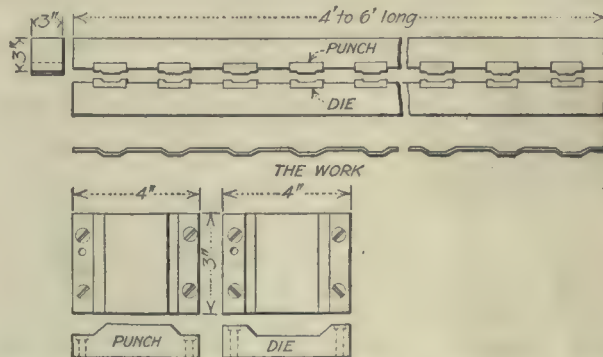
A SET OF SECTIONAL TOOLS FOR BENDING WIRE RODS IN THE BIG PRESS
